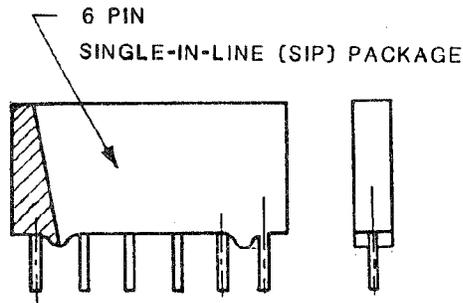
Outline drawing of a style RZ040 package configuration.
